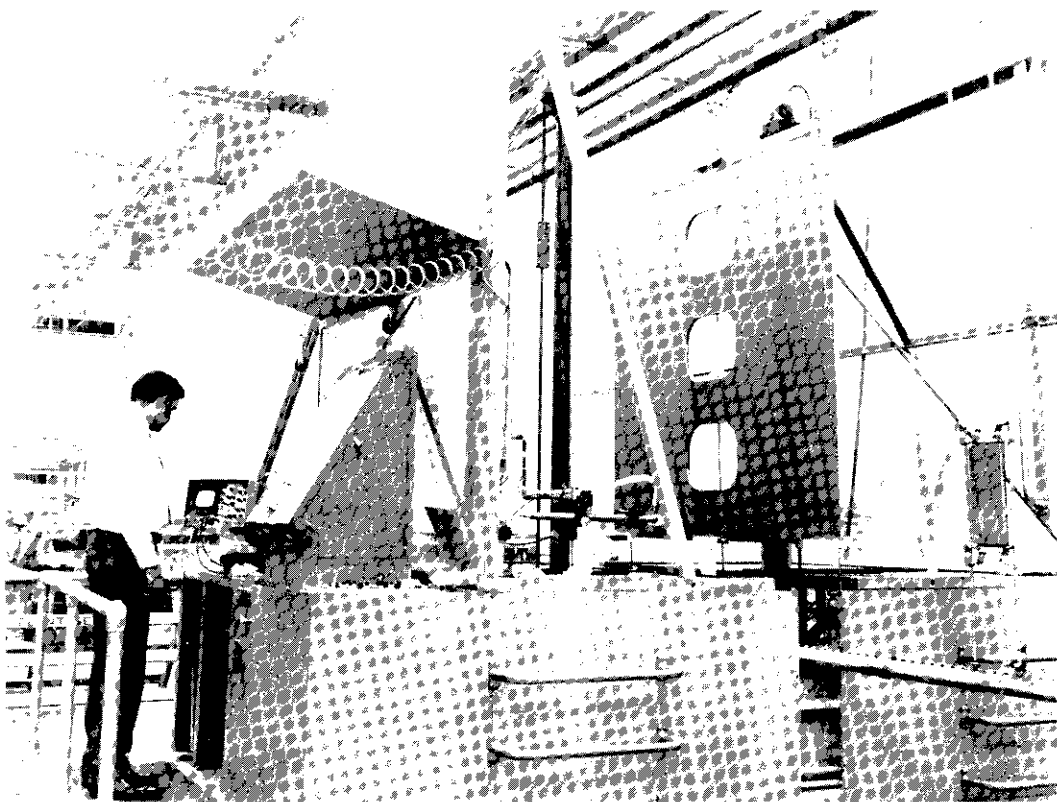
ULTRASONIC NONDESTRUCTIVE TESTING EQUIPMENT
